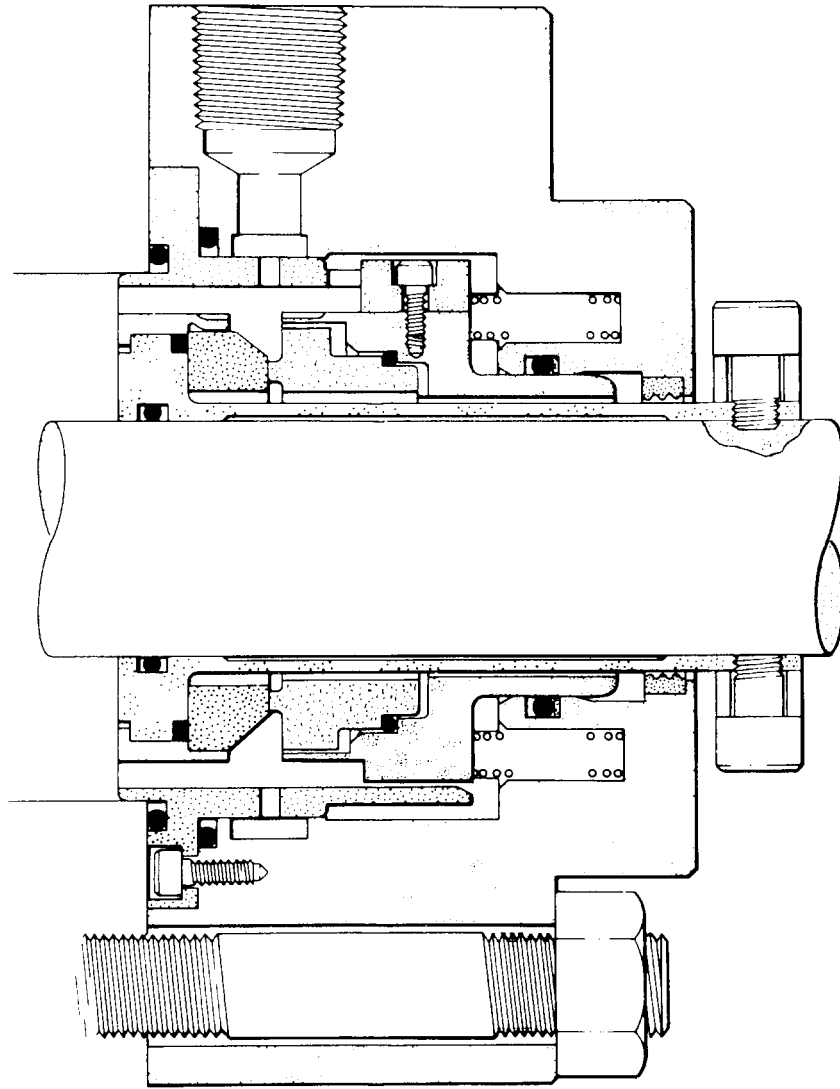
IMPROVED HIGH PRESSURE SINGLE SEAL
